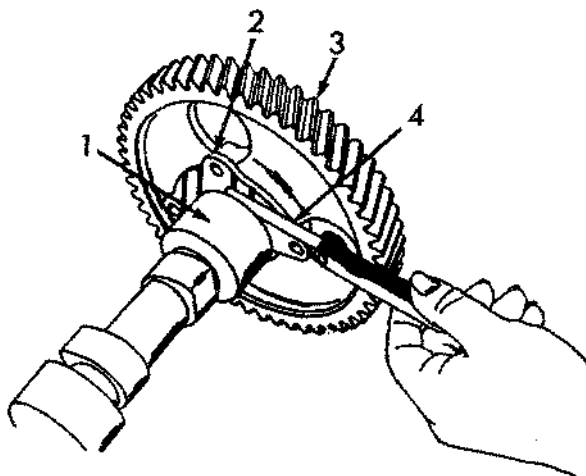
Checking Thrust Plate Clearance (T-51649)
